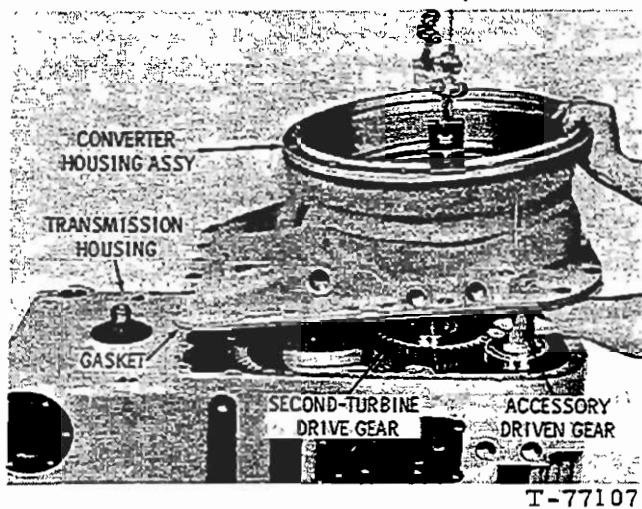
INSTALLING TORQUE CONVERTER HOUSING ASSEMBLY
